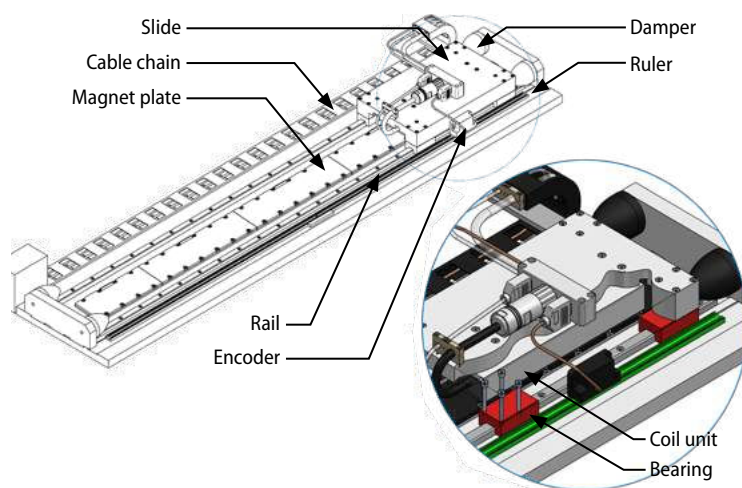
A complete axis system with Tecnotion coil unit and magnet plates installed.
